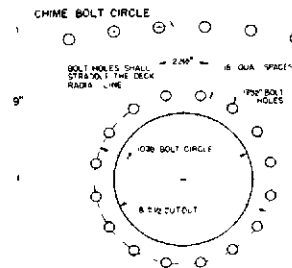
Bolting Pattern for 8-In. Circular Thief Hatches, Pressure-Relief, and Vacuum-Relief Valves
